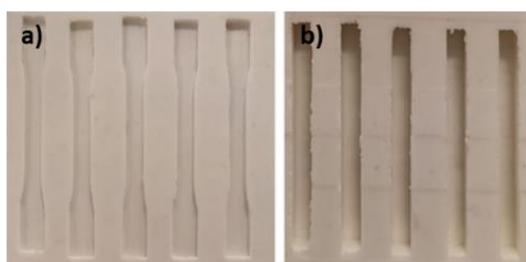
Mold for, (a) Tensile, flexural composite samples and (b) Izod impact composite samples
